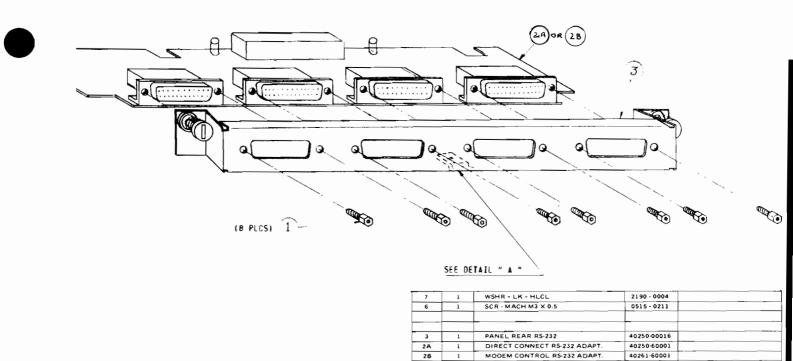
Direct Connect Adapter/Modem Control Adapter Assembly
